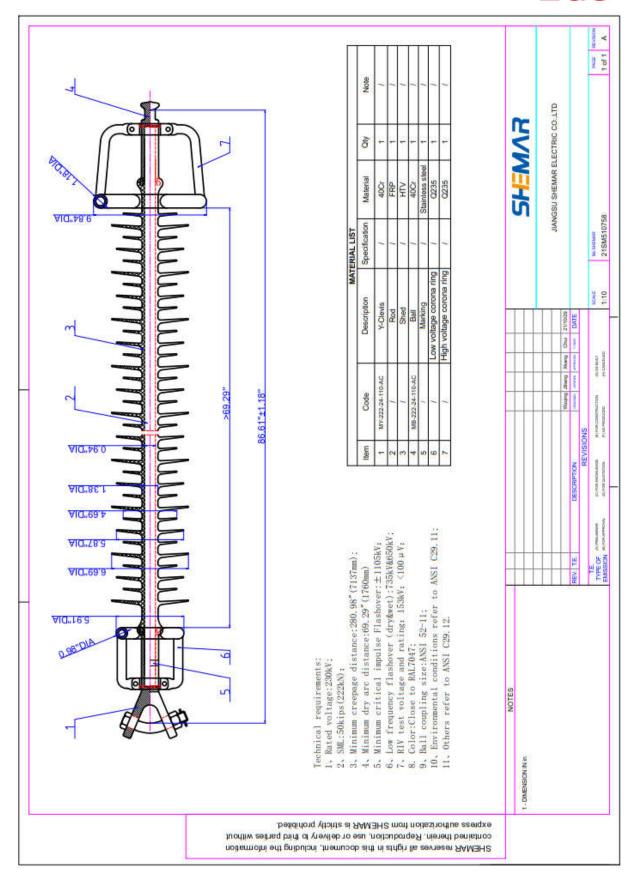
230 kV Composite insulator, SML 222 kN, drawing No. 21SM510758 Rev. A
